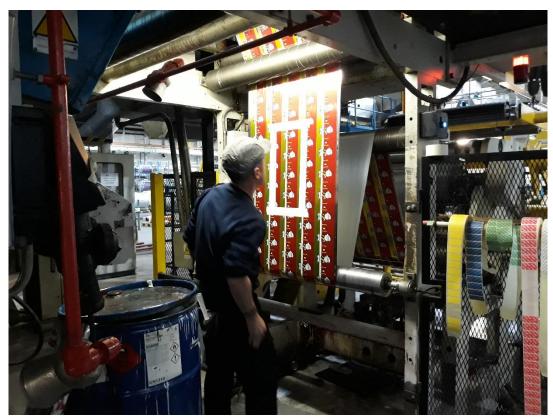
Mr Terry Hughes - Printing Area, Rotomec Print Machine 334 Operative
